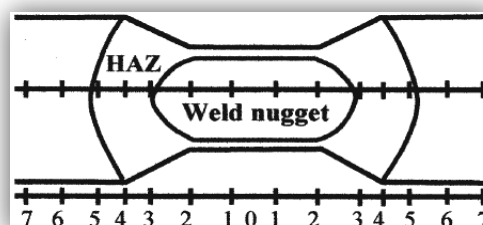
Welded samples' plain appearance with hardness test points [46]
